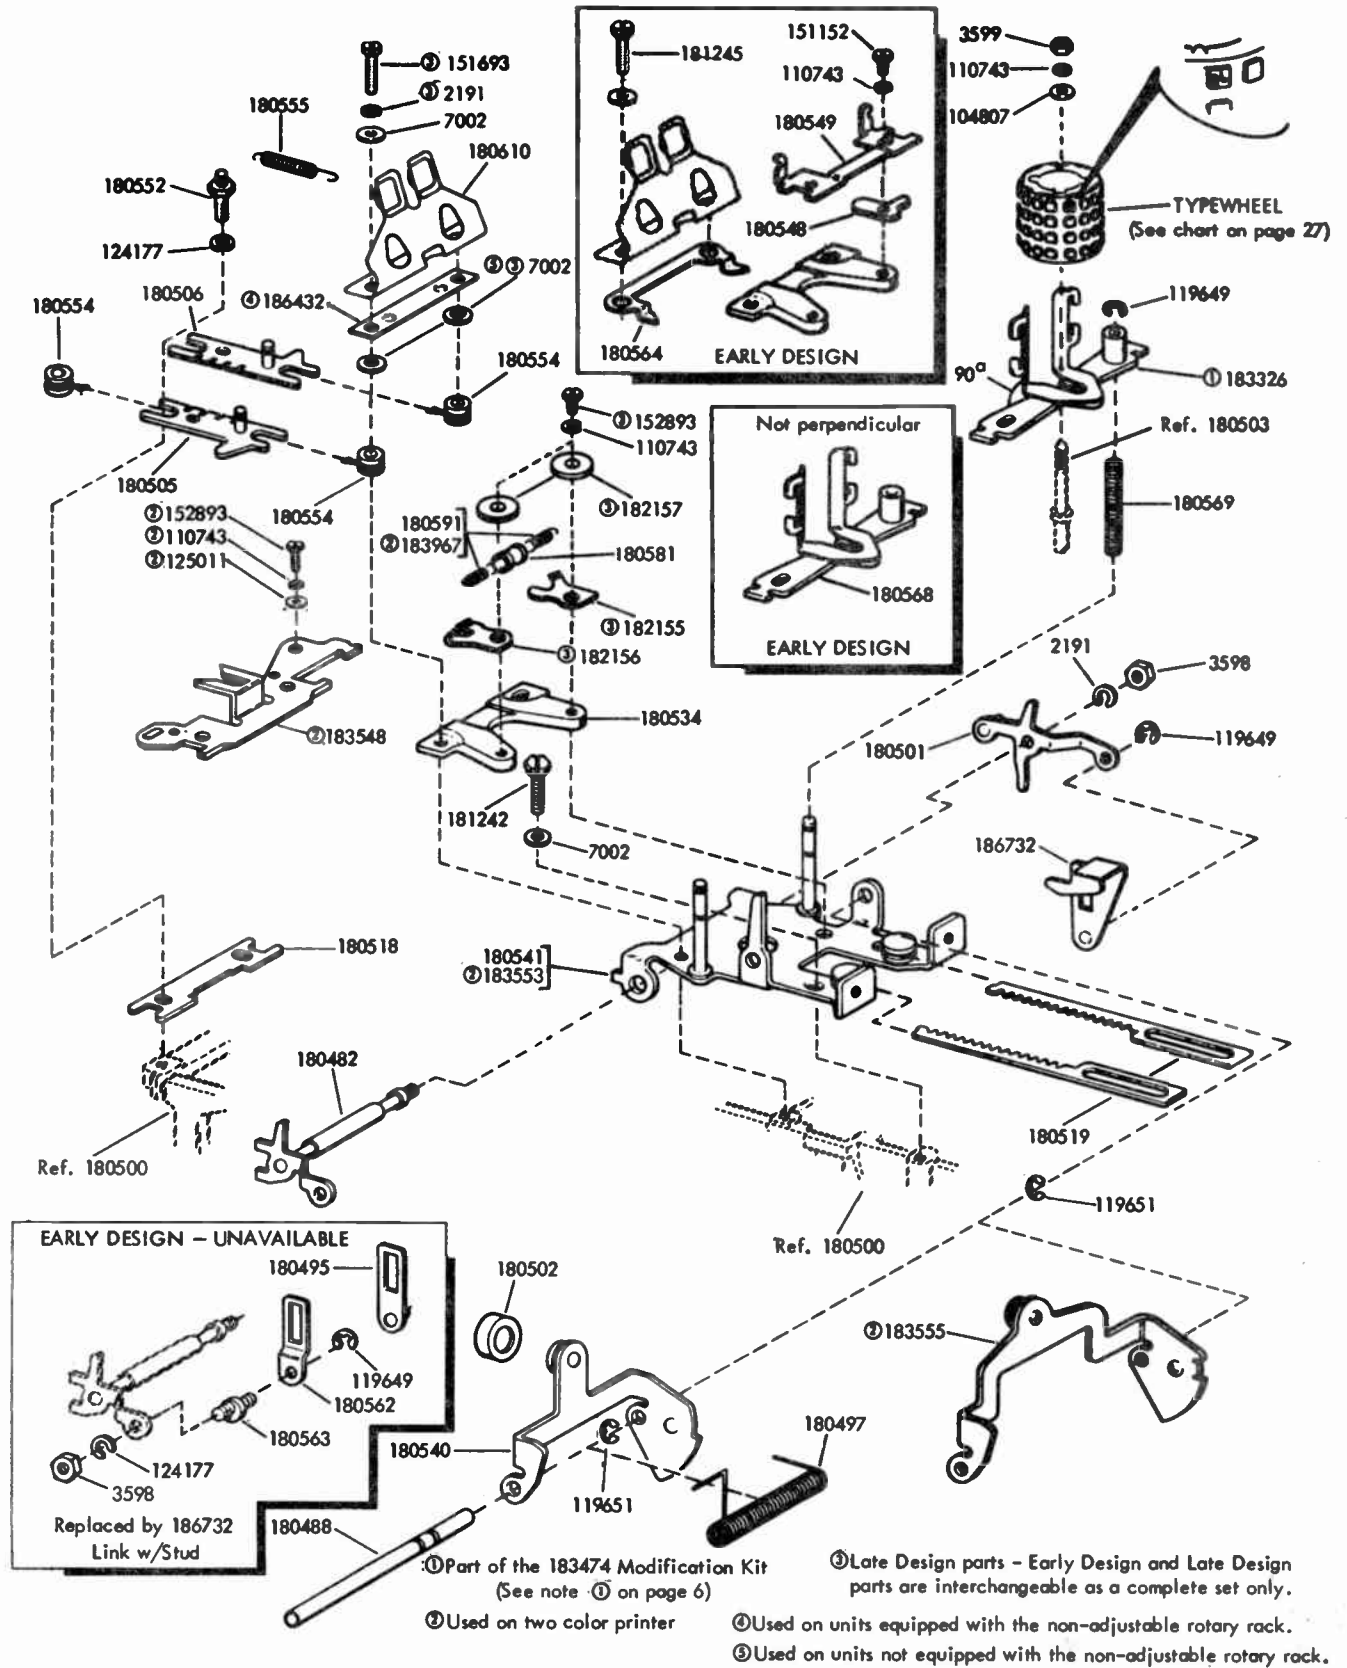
CARRIAGE UPPER PLATE MECHANISM
